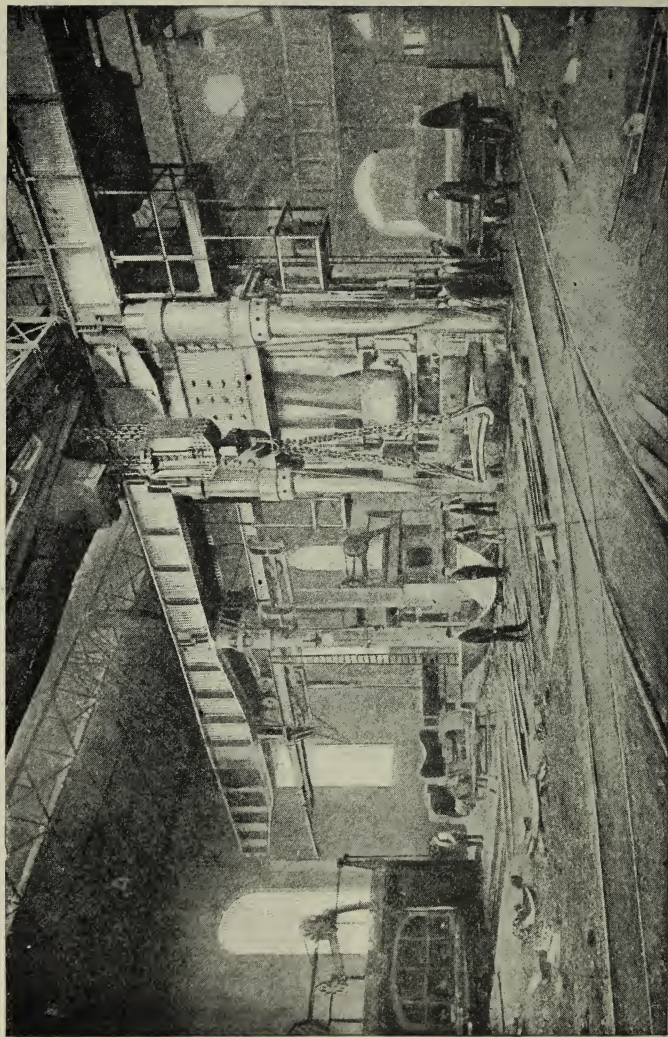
Bending an Armour Plate in a Hydraulic Press
